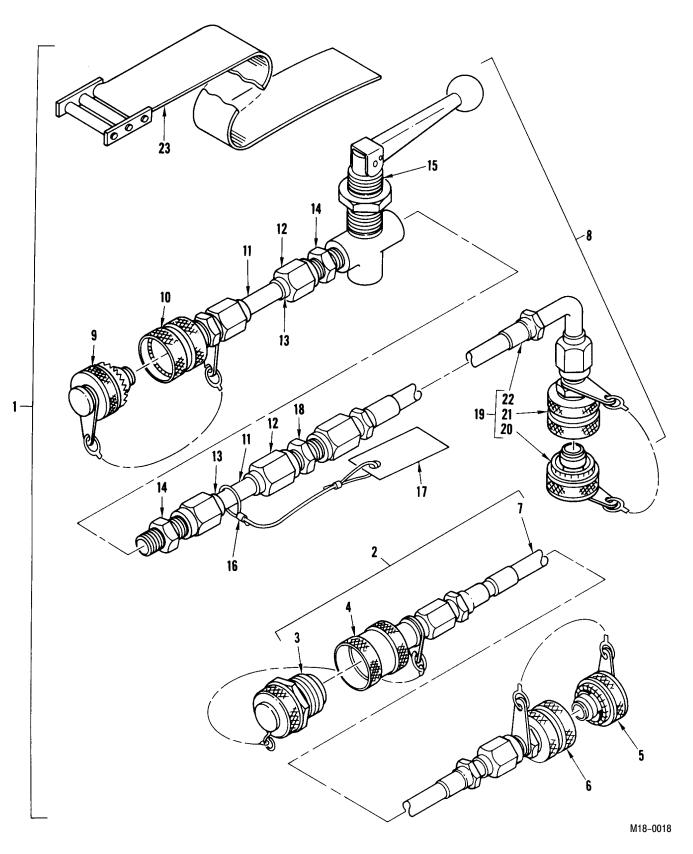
GROUP 80 SPECIAL TOOLS HYDRAULIC HOSE KIT
